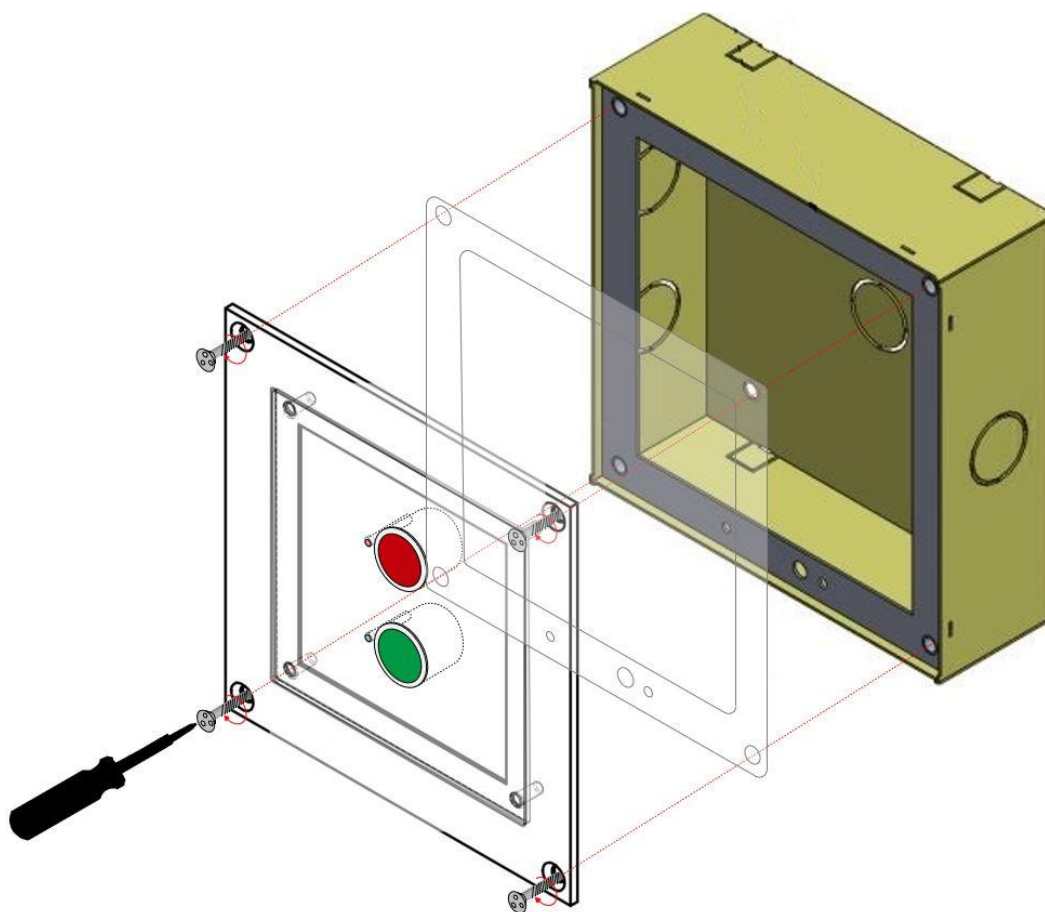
Assembling the module with the front panel, front panel gasket and installation housing
